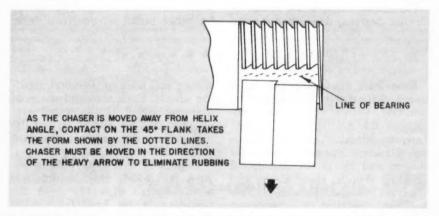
Line of contact on the 45 degree flank takes a new position back of cutting edge.
